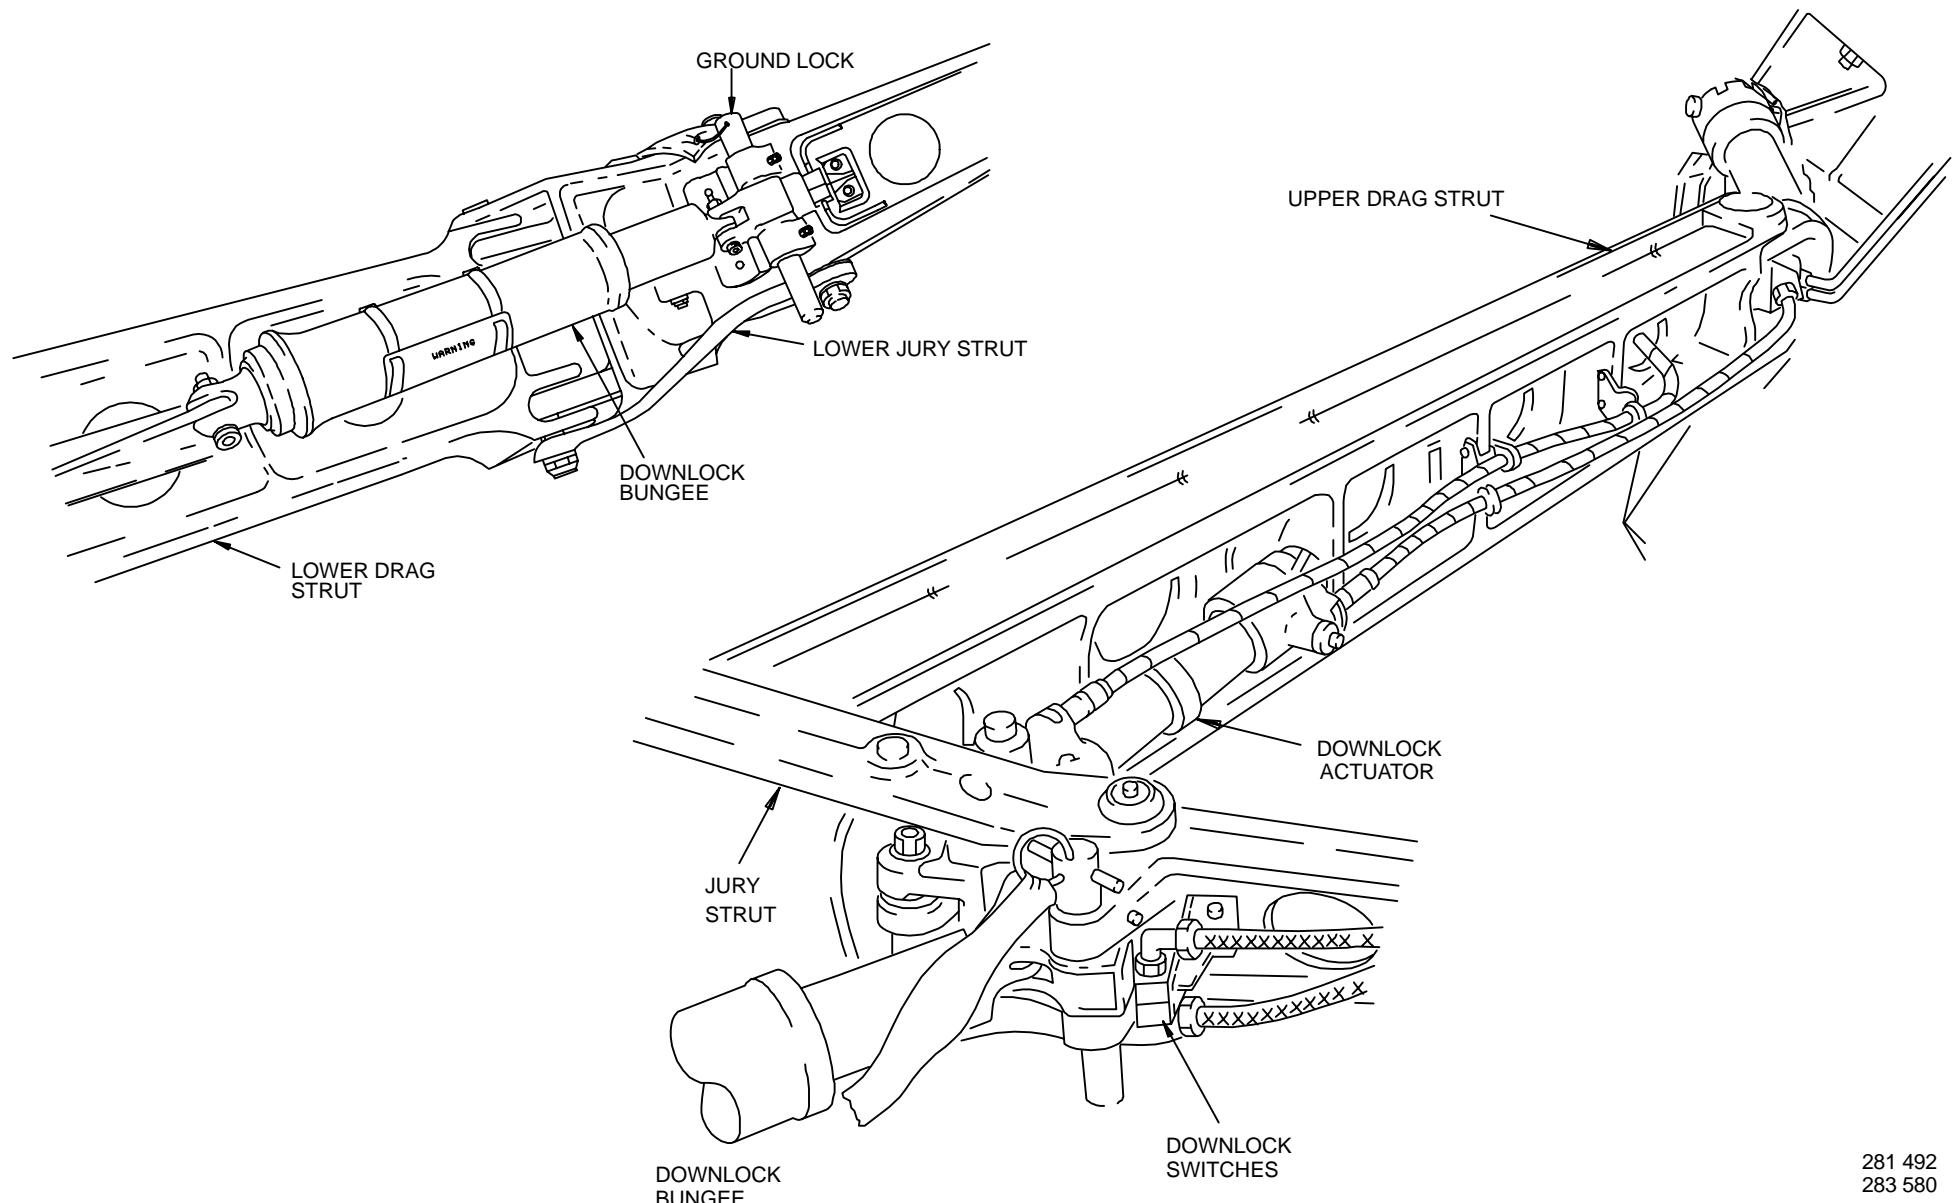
BODY GEAR DOWNLOCK COMPONENTS
